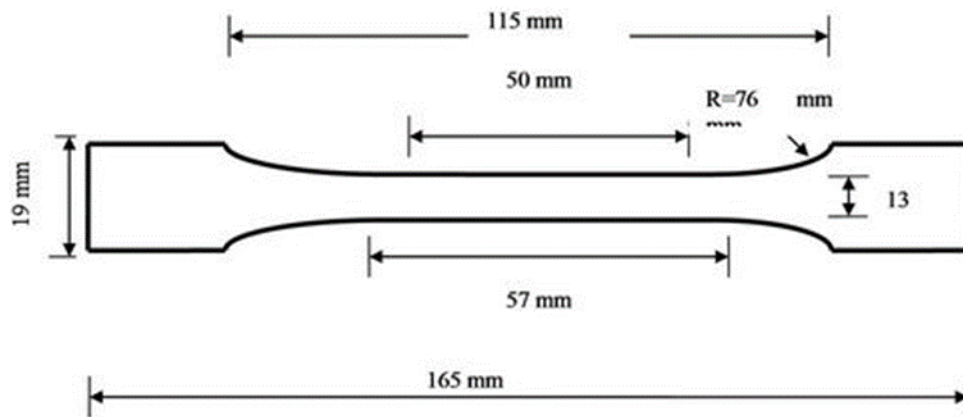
Type 1 specimen geometry according to ASTM D638 standard(9).
